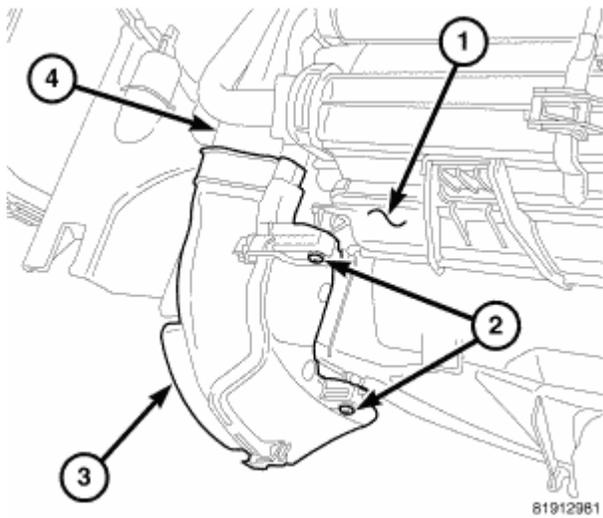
HVAC Housing, Screws, Lower Front Passenger Side Floor Duct & Upper Front Passenger Side Floor Duct
